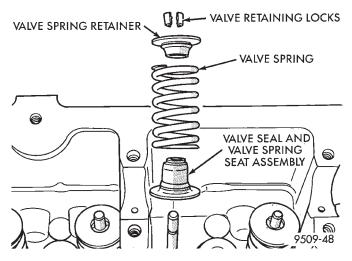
Valve Stem Seal/Valve Spring Seat CYLINDER HEAD
